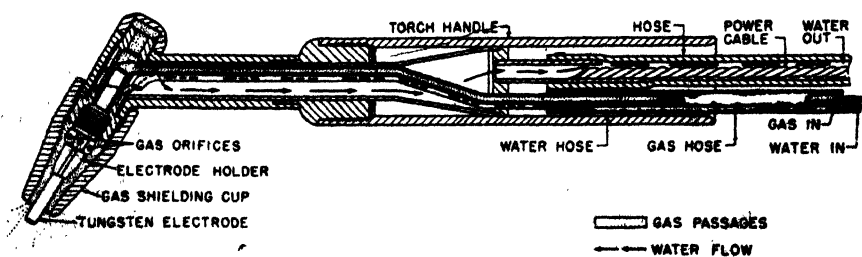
Argon-shielded arc welding electrode.
